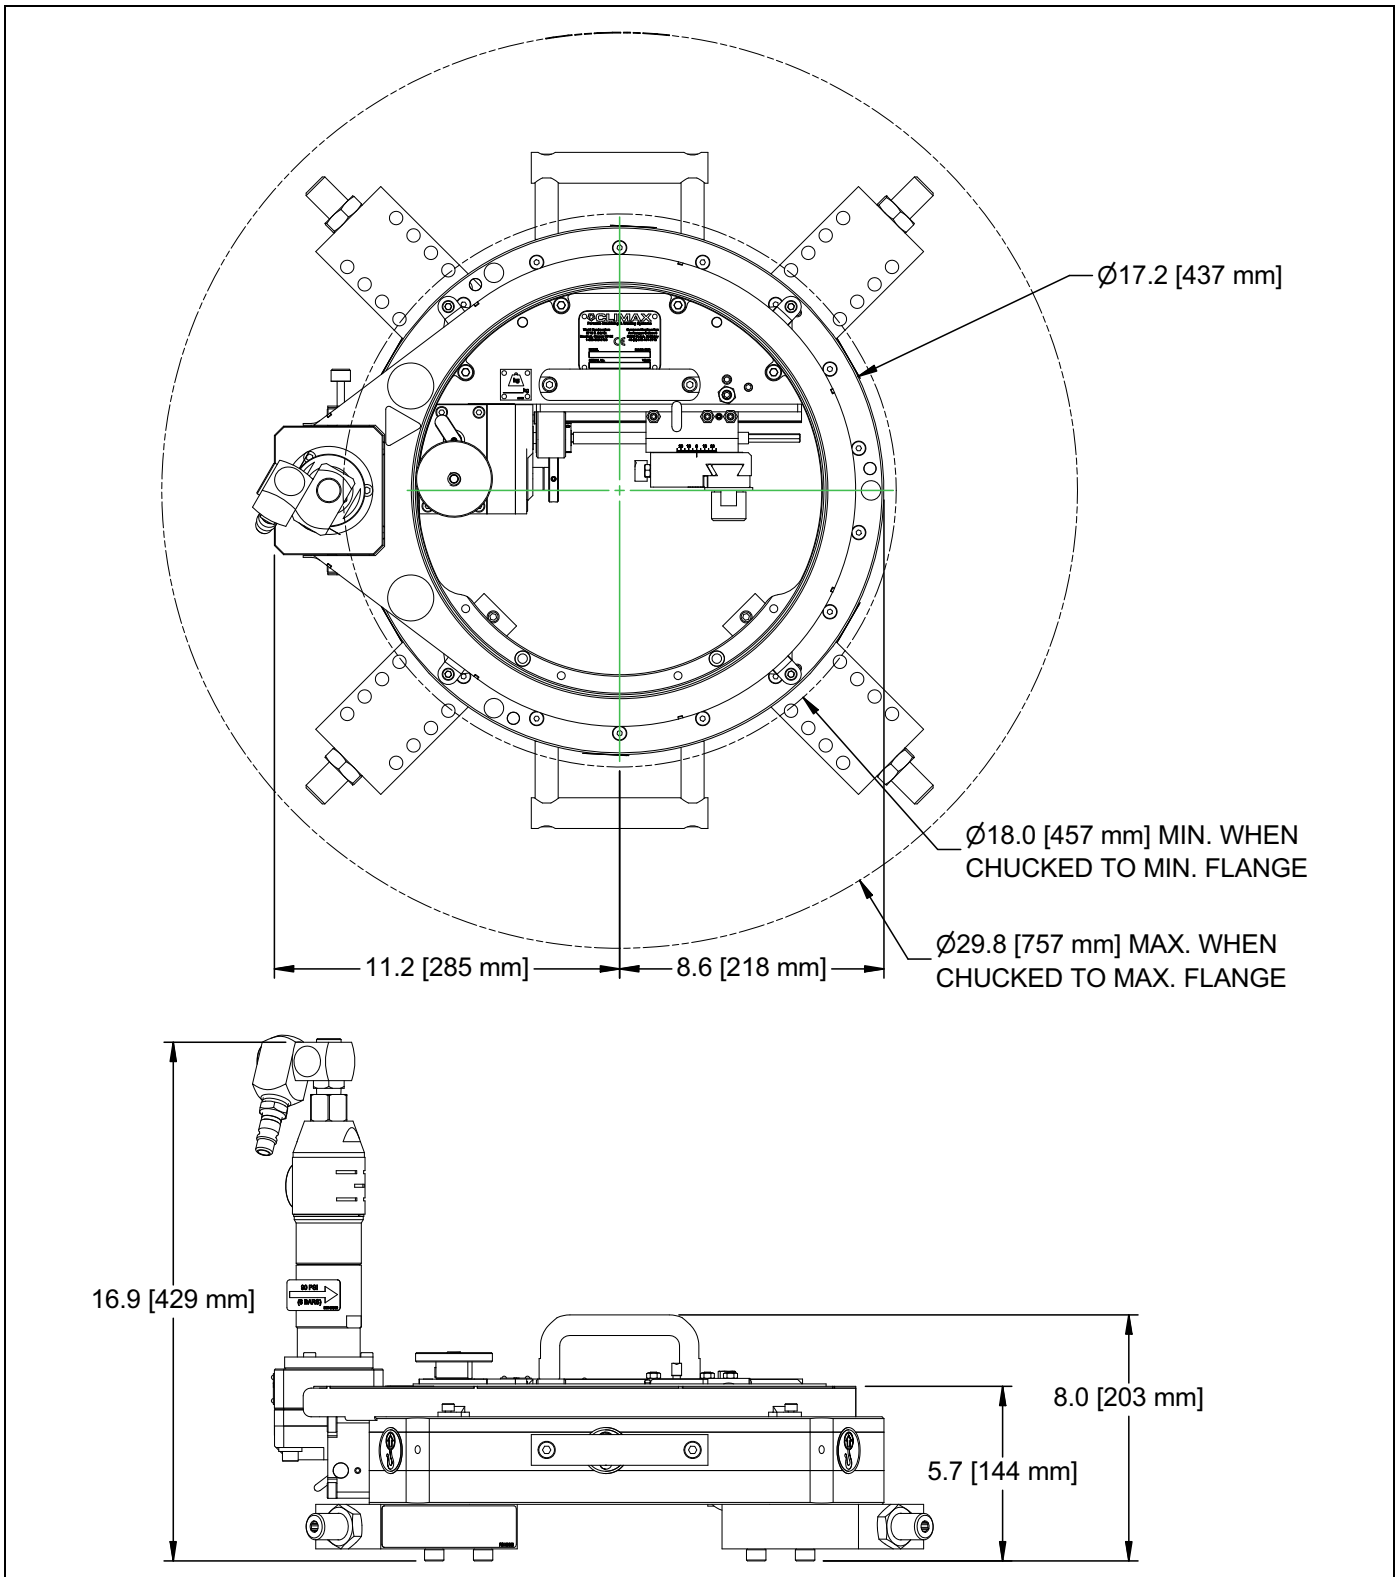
FF1200 MACHINE DIMENSIONS
